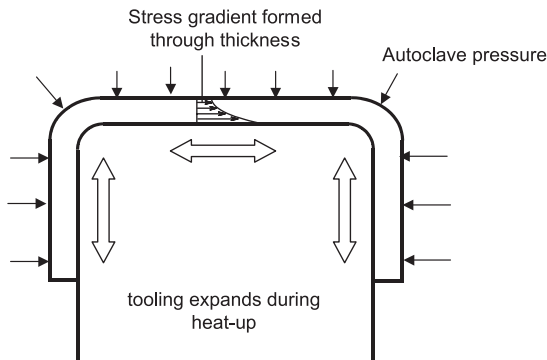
Stress acting on a composite laminate during processing. On the bag-side, autoclave pressure, and on the tool-side, tool-part shear stress.
